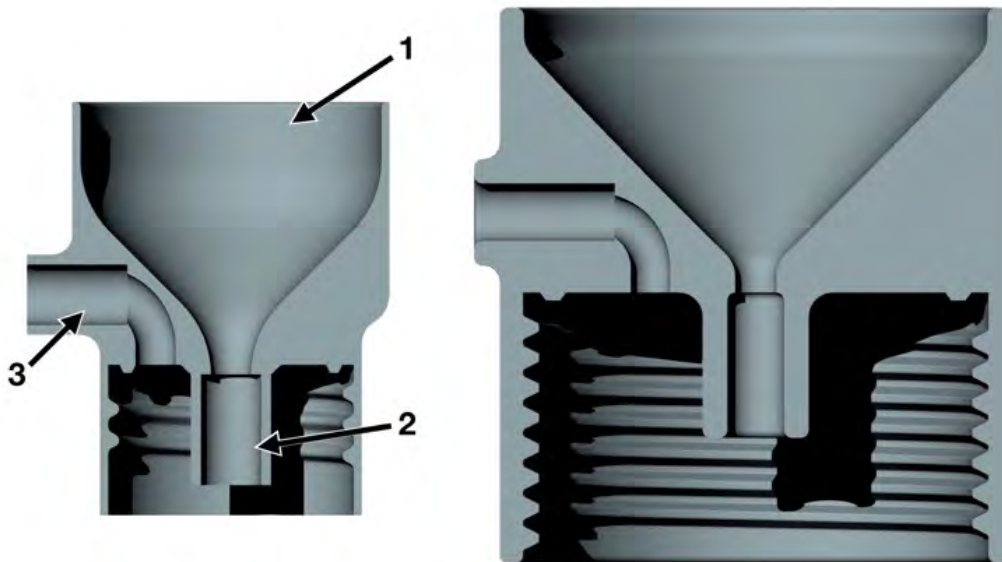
Cutaway view of the 3D printed bottle caps, with funnel (1), offset formed vent tube holder (2) and central inlet tube holder (3) (Left, cap for 225 ml bottles, right, cap for 2 L bottle).
